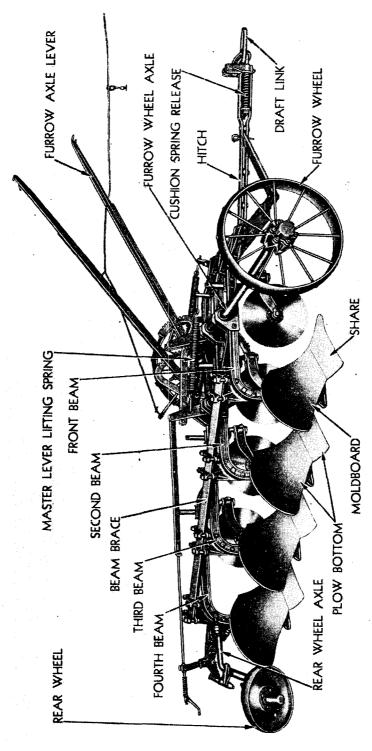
MOLDBOARD VIEW (RIGHT HAND) JOHN DEERE No. 7 TRACTOR PLOW
